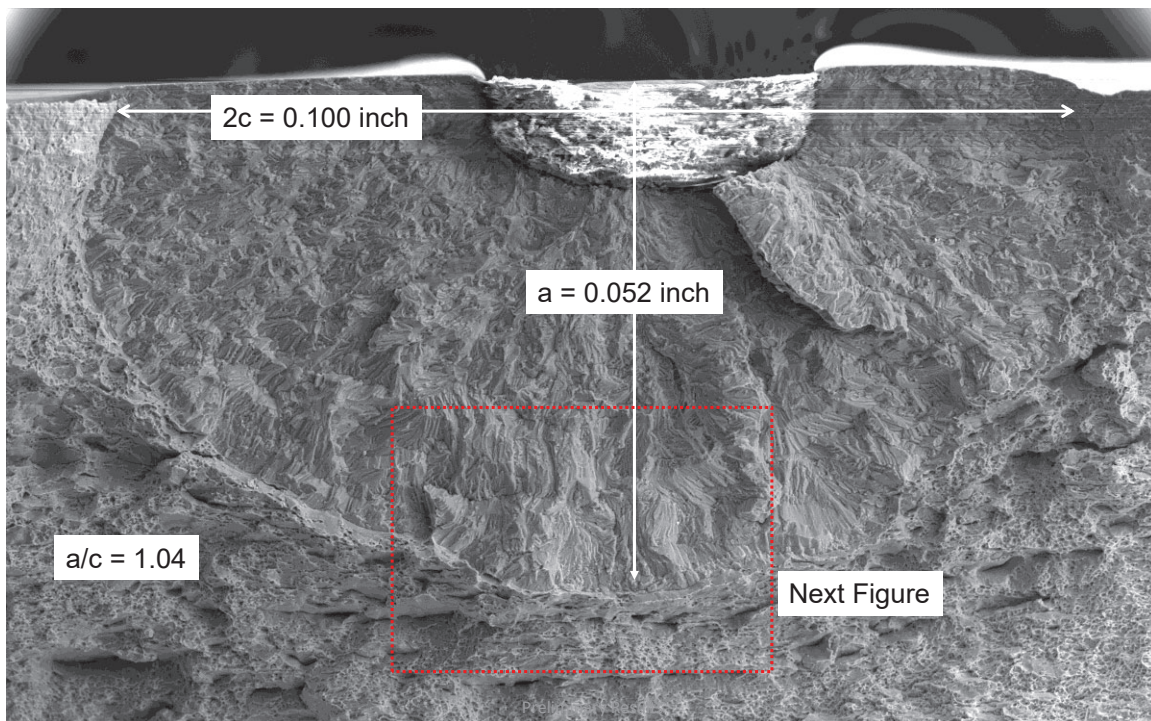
Fracture surface at the maximum depth location for the AF+LEFM test UL-P0-07 (LEFM: -40,000 psi to 25,000 psi).
